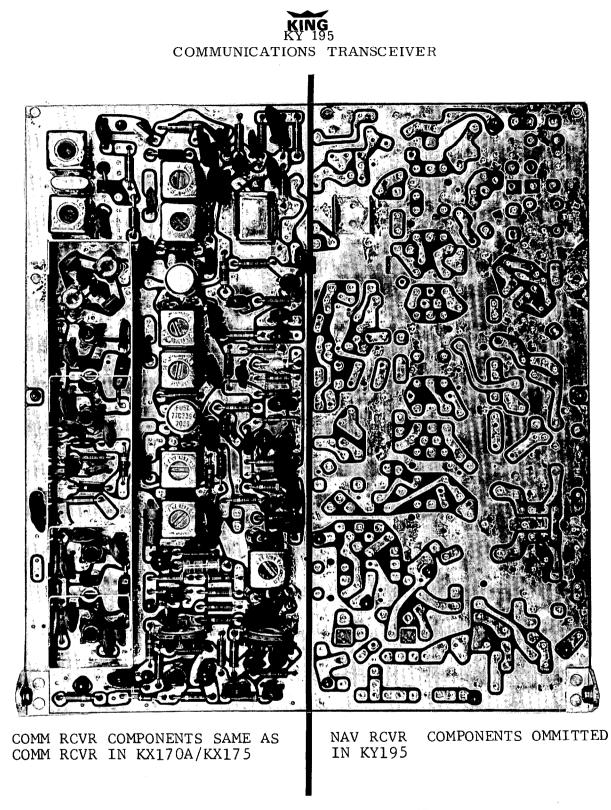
RECEIVER BOARD SUB-ASSEMBLY (Dwg. No. 696-6107-00)
